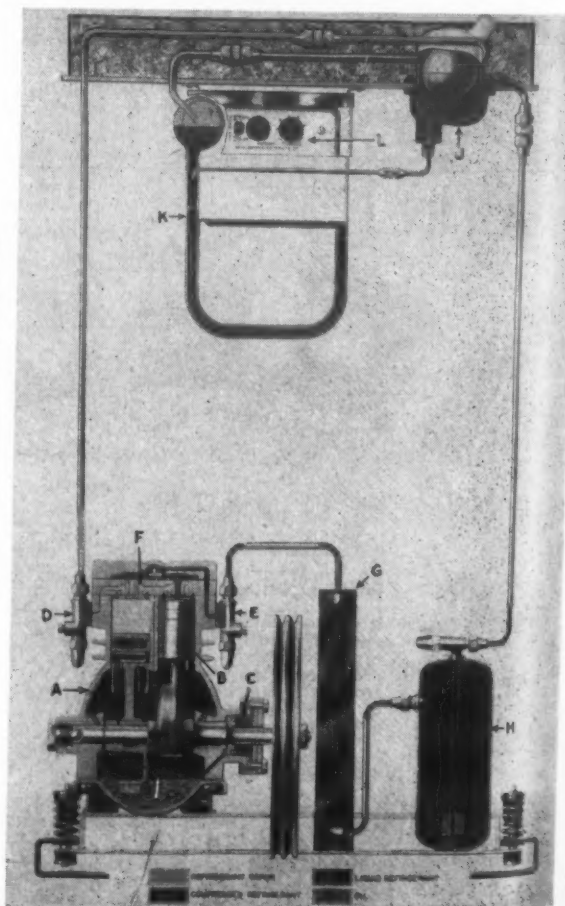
Cross-sectional chart of typical Scotch-yoke machine.
